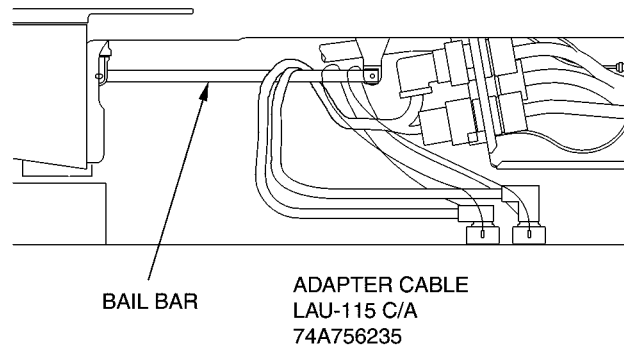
MER/BRU-41/BRU-42 Adapter Cable Installation (Typical)
